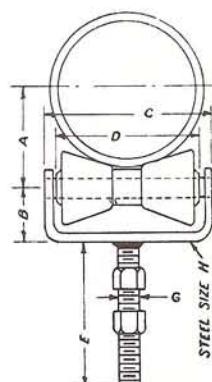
Roller Support is used to support piping on structural steel brackets and frames.
